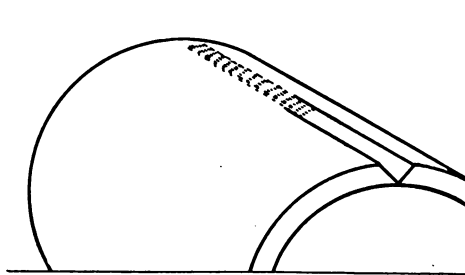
INDENTS, NOT SUFFICIENT WELDING-ROD ON.
